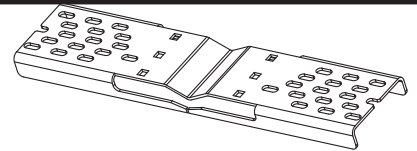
While centering rear contact plate, align with rear u-bolts and mark skid plate for clearance hole drilling.
